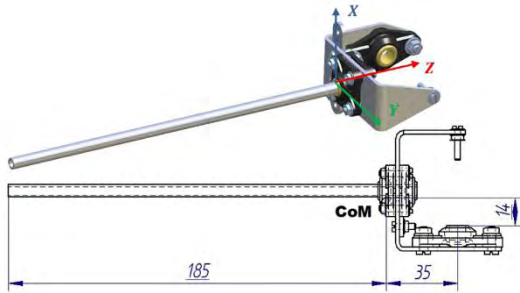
CoM and dimensions (in mm) of the forearm structure.
